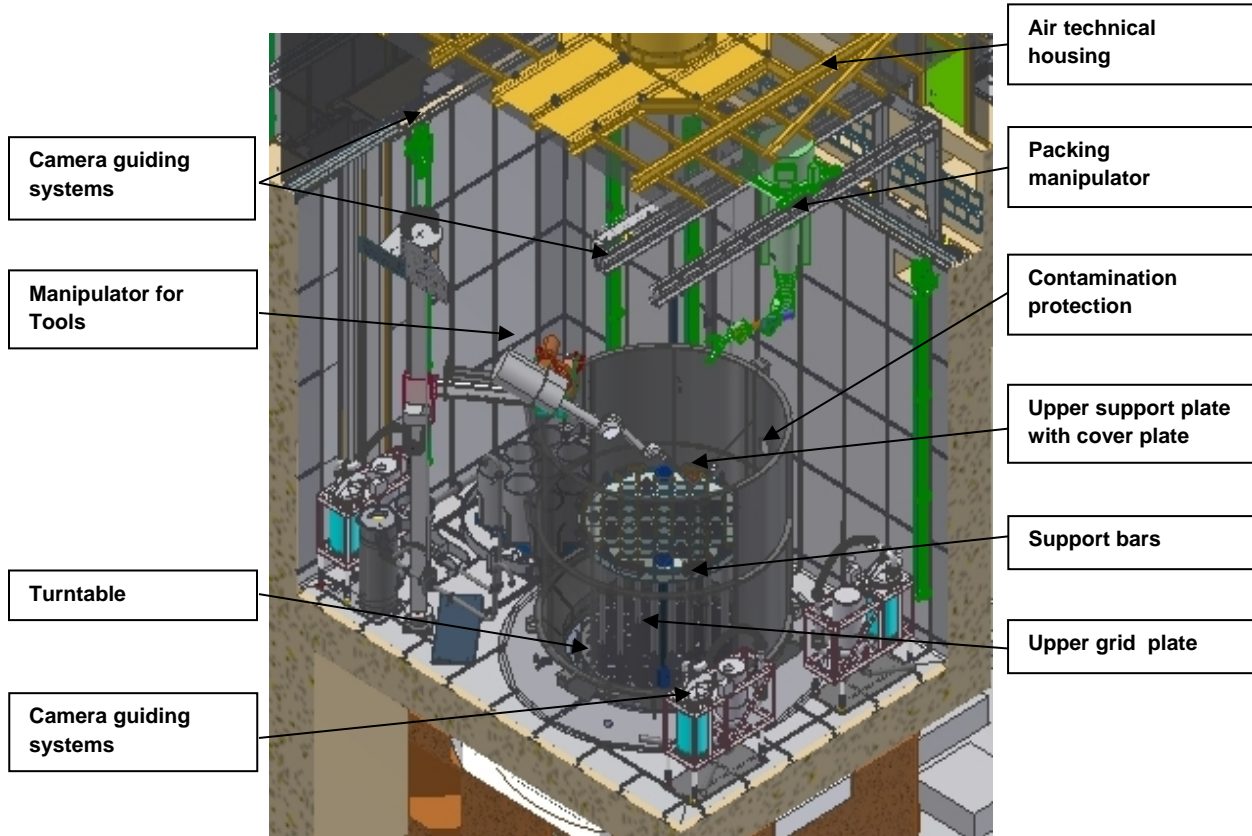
Cutting of the upper core structure in the wet cutting area reactor room 306/106
